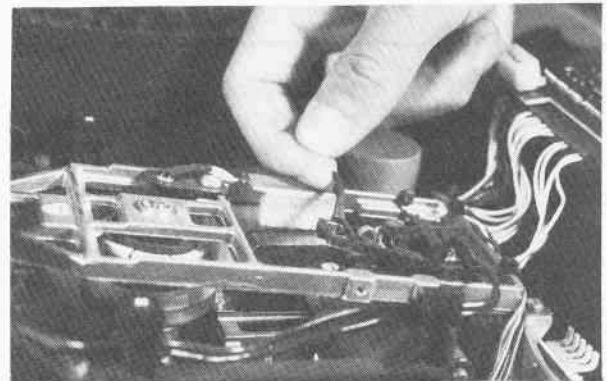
Remove the two flathead screws holding the disk drive to the chassis.
